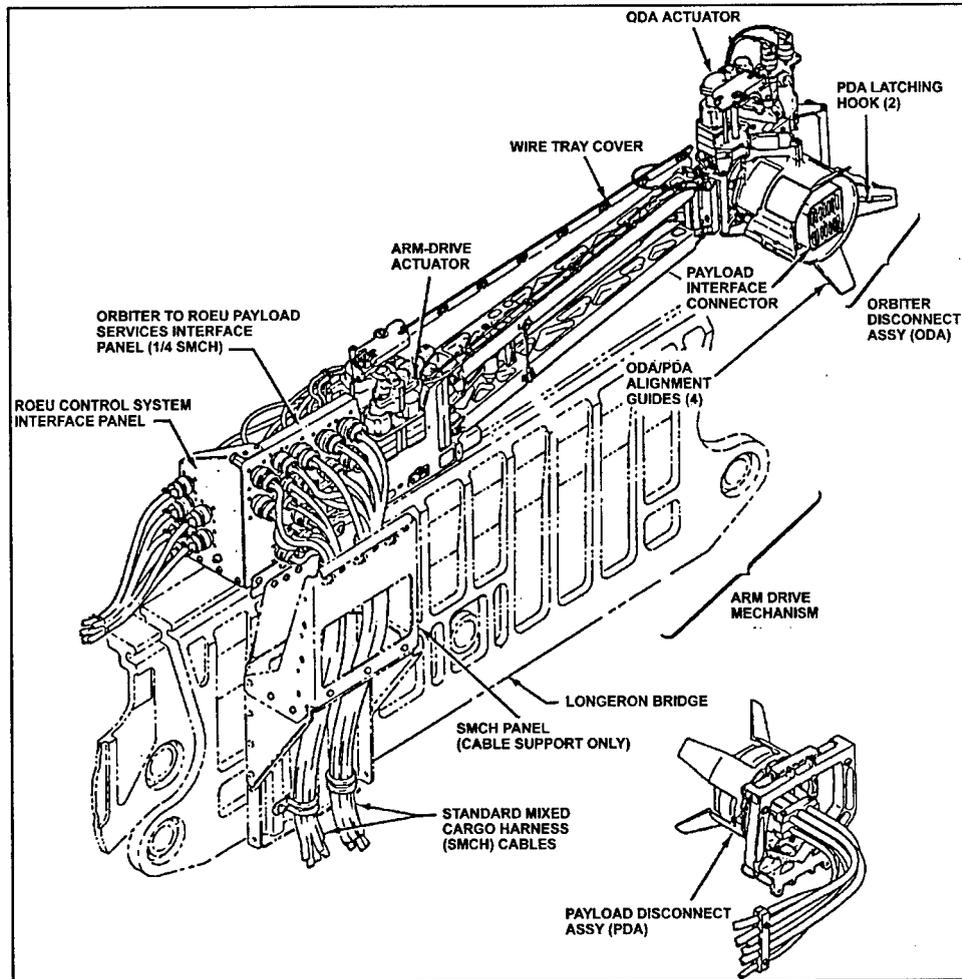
TYPICAL ROEU MOUNTED ON A BRIDGE RAIL (DEMATED POSITION), PORT SIDE INSTALLATION.
